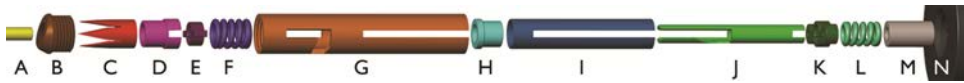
Exploded view of the spring-loaded biopsy harvester design with its 14 components (A-N), showing their mutual axial alignment.
